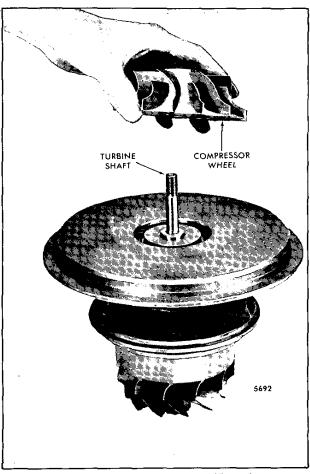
Removing Compressor Wheel from Turbine Shaft
